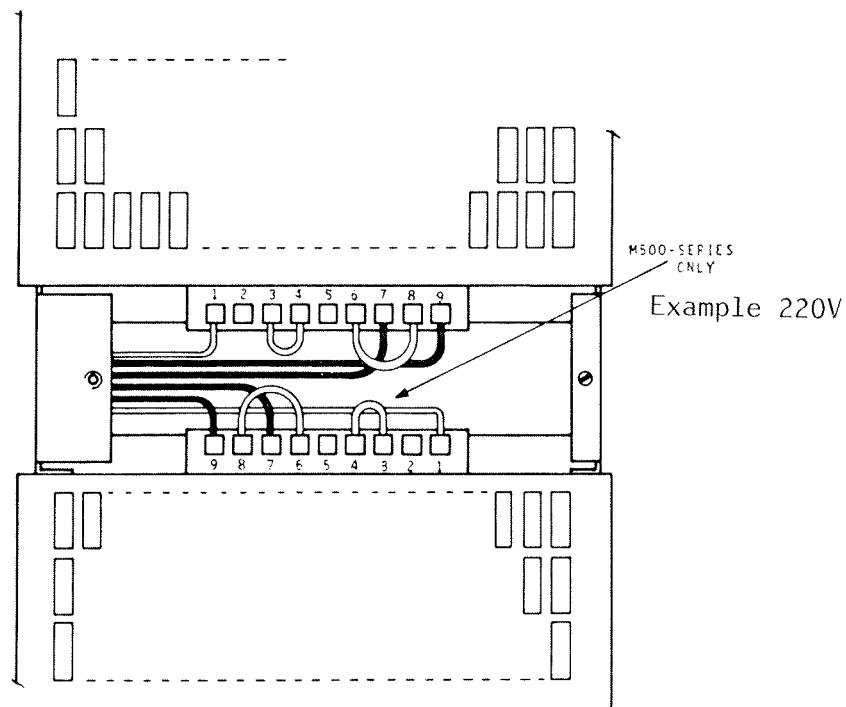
TRANSFORMER LOCATION M4P, M5P BOX
